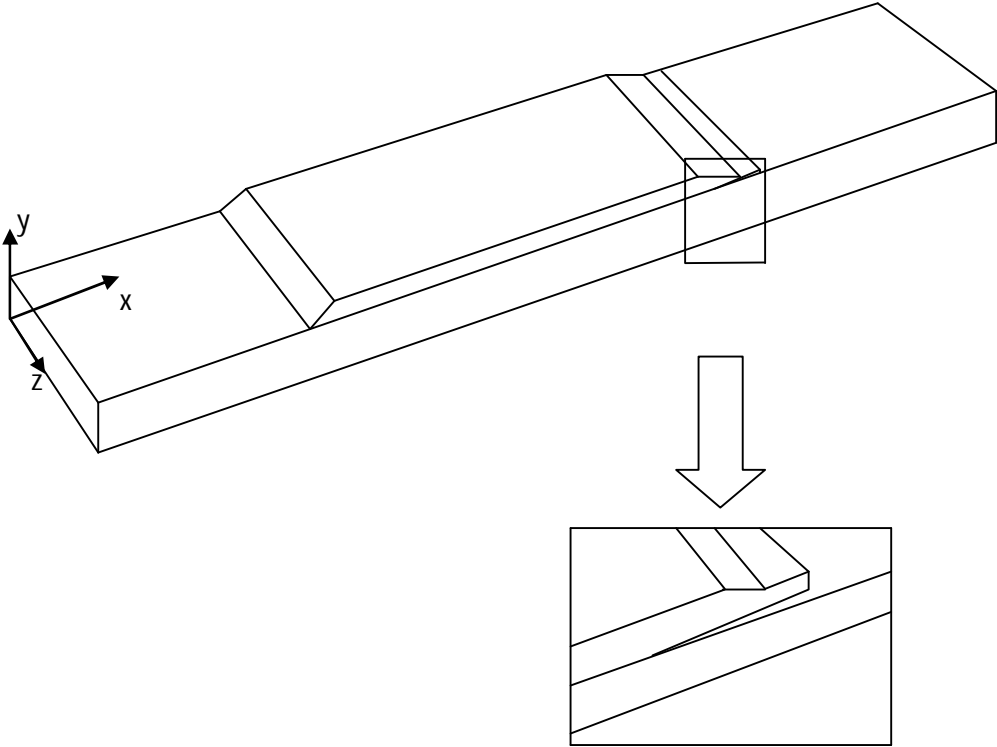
Typical damage pattern observed in skin-stiffener specimen
